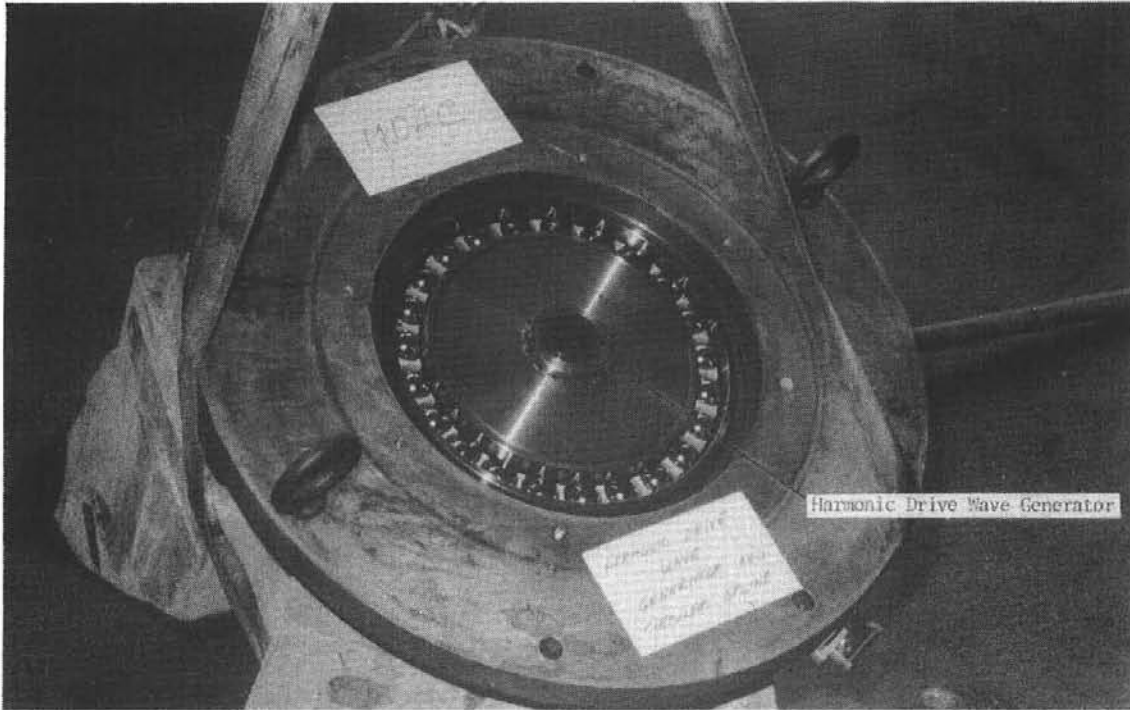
MDAC Harmonic Drive Wave Generator and Circular Spline Assembly
